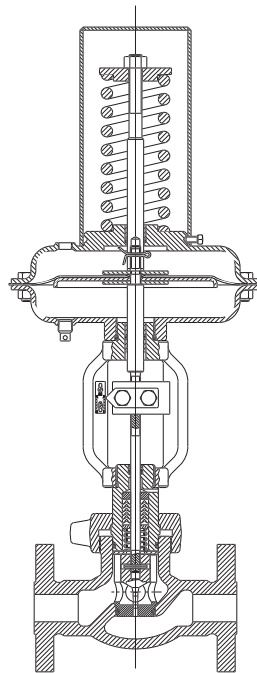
1.00" Series 2200 valve with a no. 9 direct (spring opening) actuator. Throttle trim, flow up.
